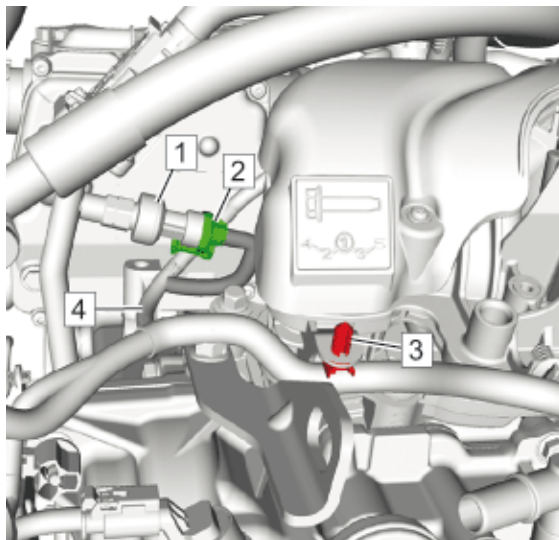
A/C High Pressure Cutoff Switch, Electrical Connector, Retainer And Engine Wiring Harness
